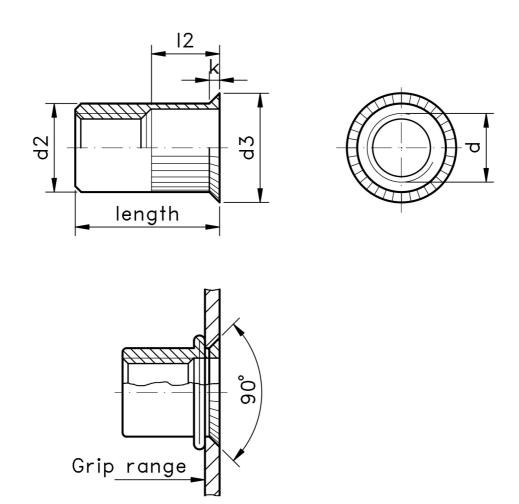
Rivet nuts with countersunk head, a straight knurled shank and an open end
